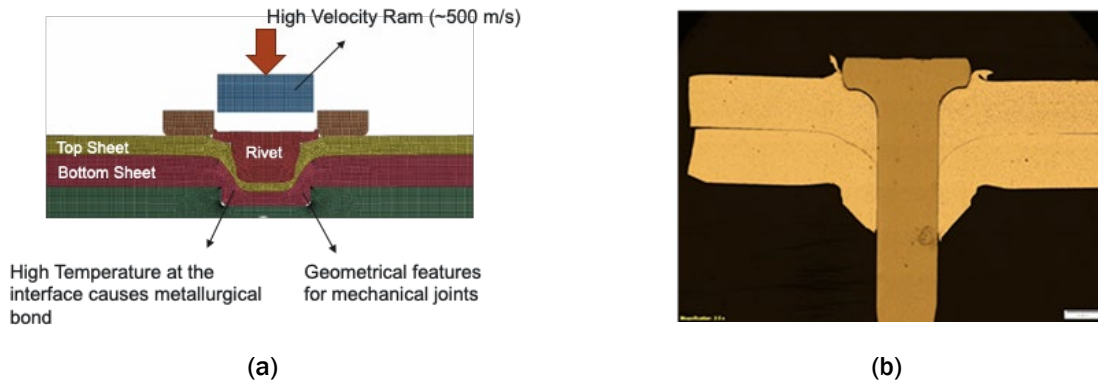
(a) Concept of HVR. (b) Optical cross-section of 6061-T6 bonded using a commercial rivet. Source: PNNL.
